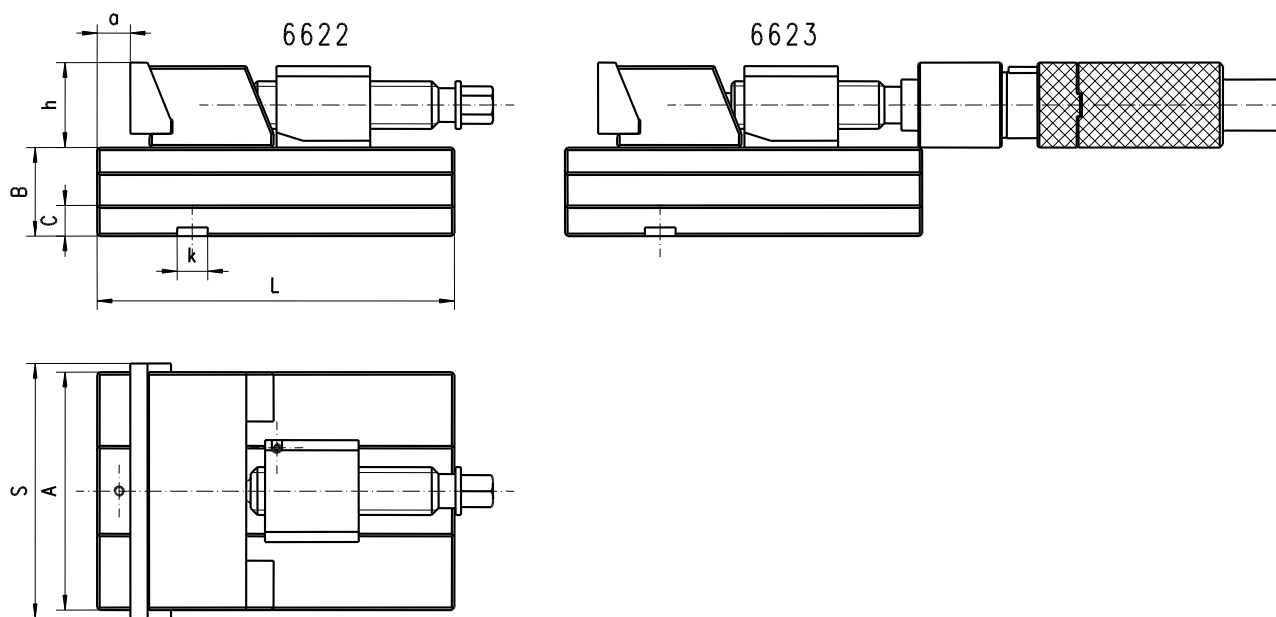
Basic dimensions of precision machine vises - type 6622 and 6623.
